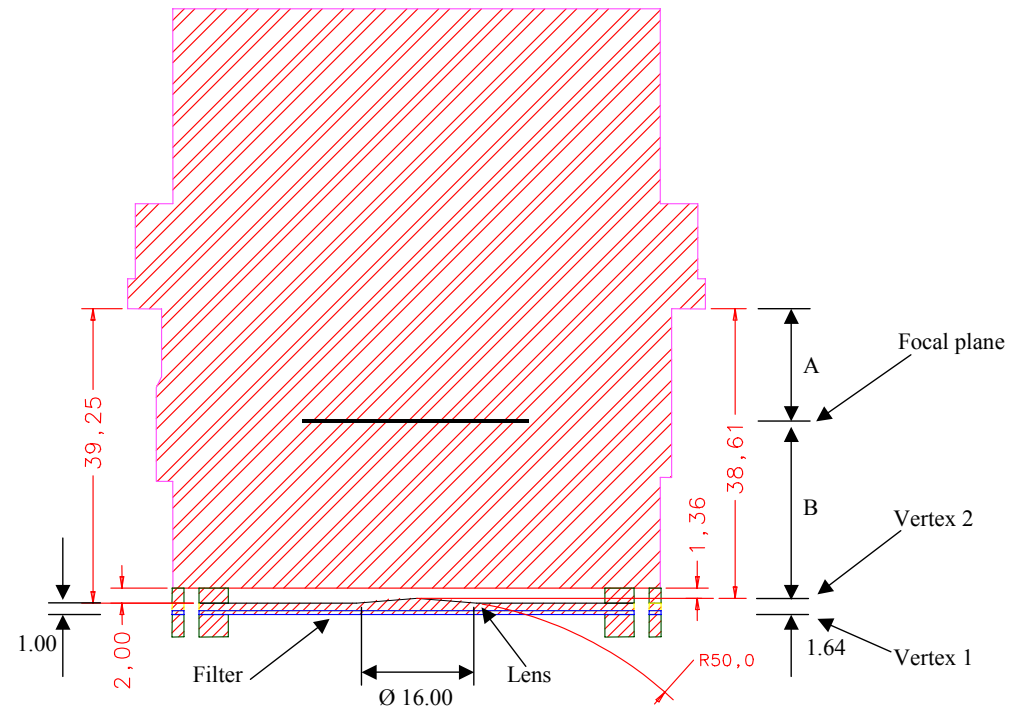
Dimensions of spectrometer lens – filter – detector assembly.
